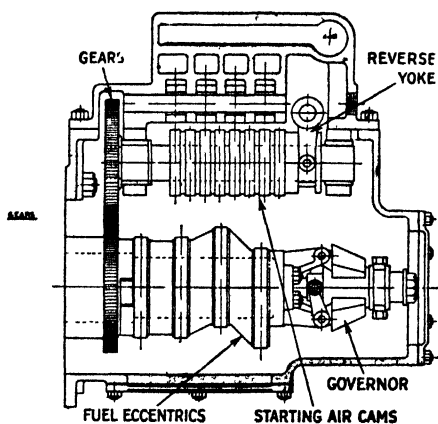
Reversing Fuel Eccentrics and Starting Air Cams, Worthington Marine Engine
